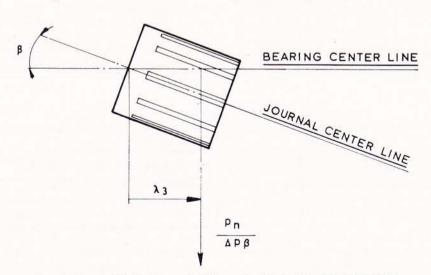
Nonparallel displacement of the center lines of journal and bearing
